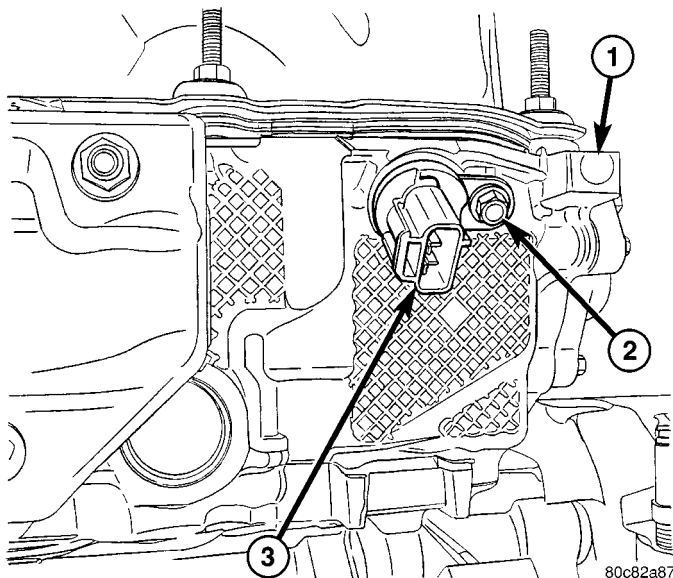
CAMSHAFT POSITION SENSOR - 3.7L
